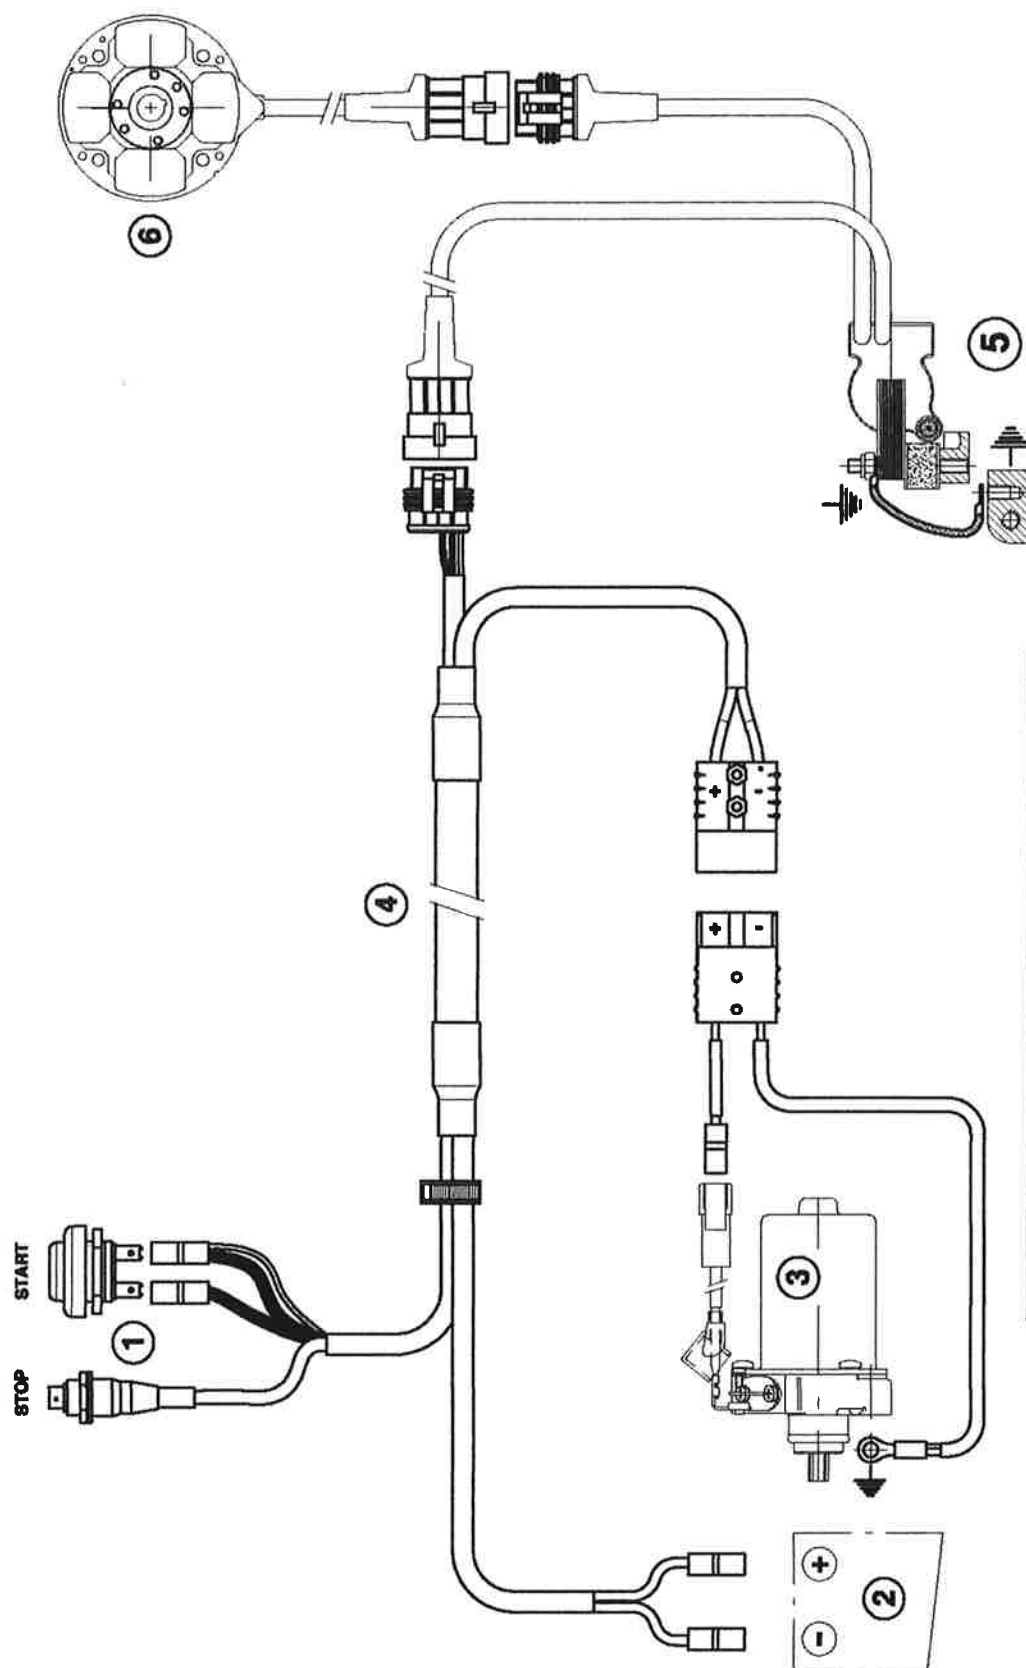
PHOTO COMPLETE ALTERNATIVE WIRING LOOM
